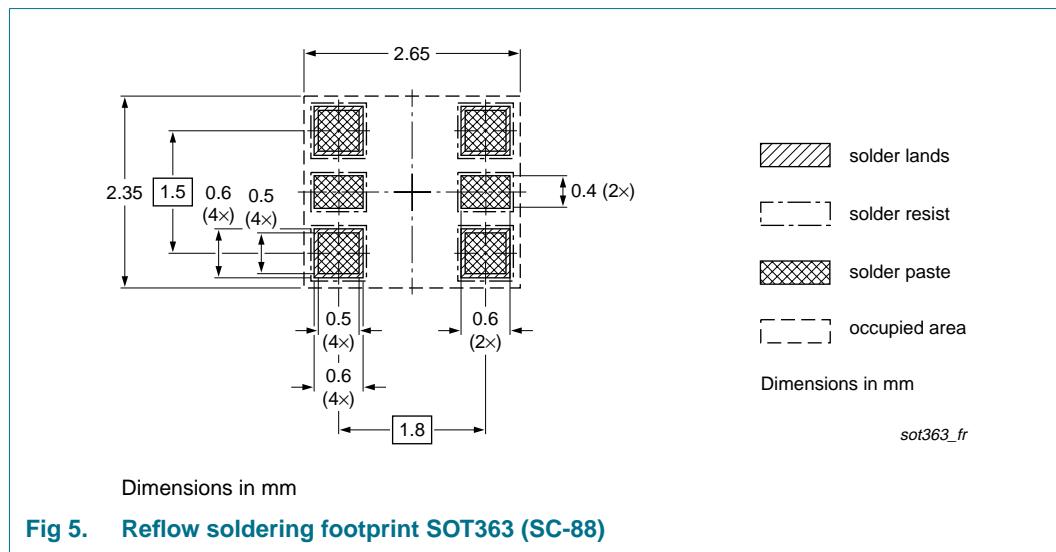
Reflow soldering footprint SOT363 (SC-88)
